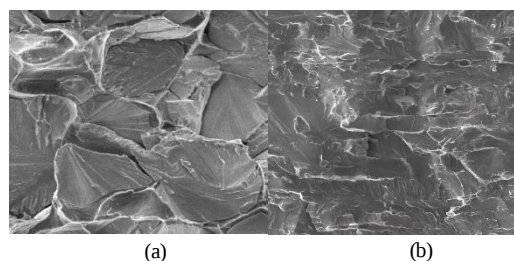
(a) standard desirable fracture surface image of WHA (88-98%) and (b) undesirable fracture surface image for 99%W alloy indicating anomaly
